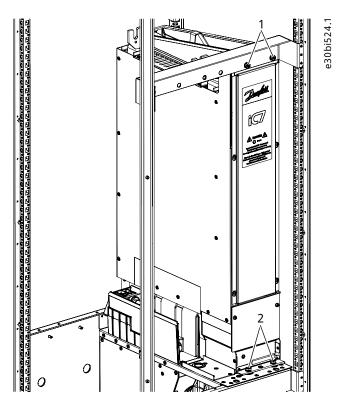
Installing the Inverter Module into the Cabinet, IR10, IR11
